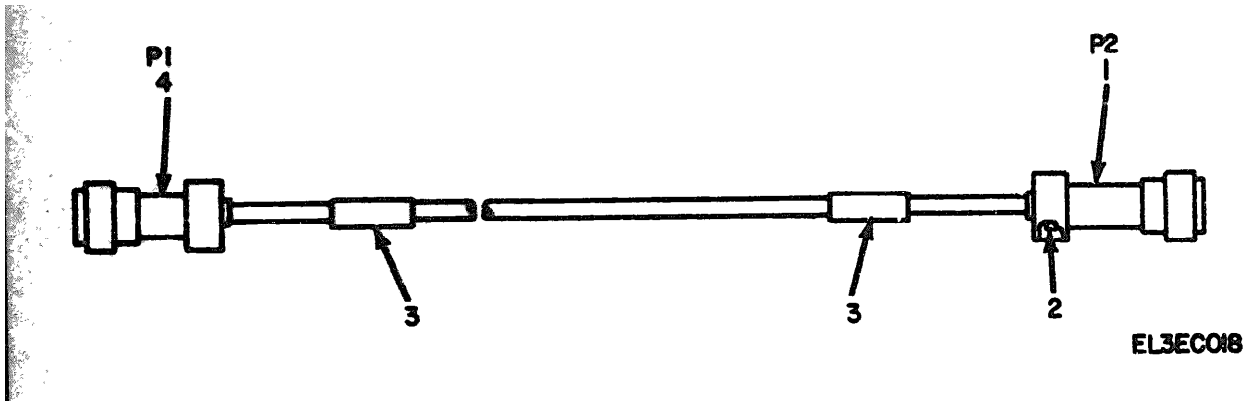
Cable Assembly, Special Purpose LM-115A (A1W1)
